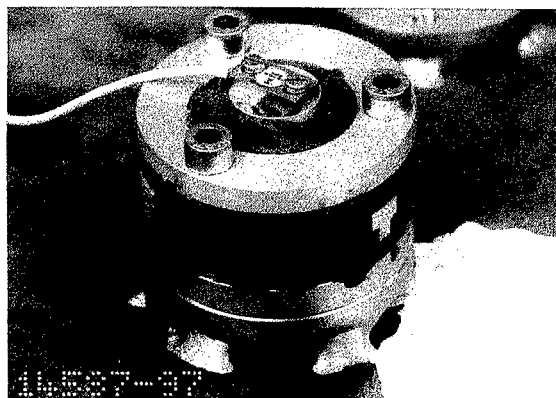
Bobkat Welded on an Armor Plate
